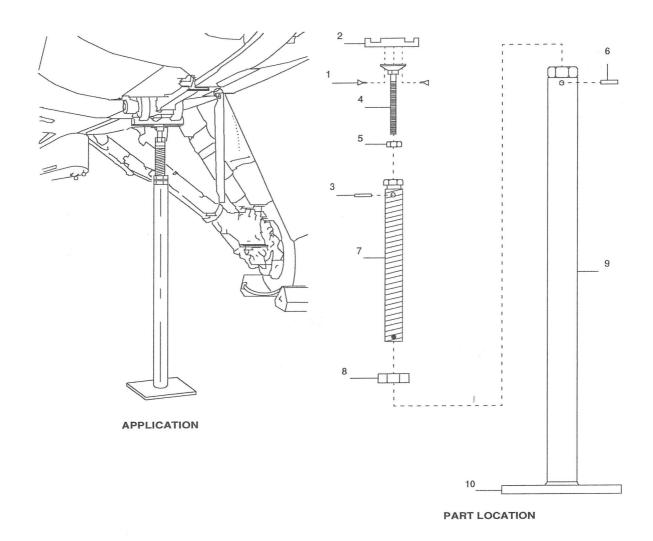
Fabrication of 16A13200L1-1 MLG Jacking Adapter Assembly. (Sheet 2)
